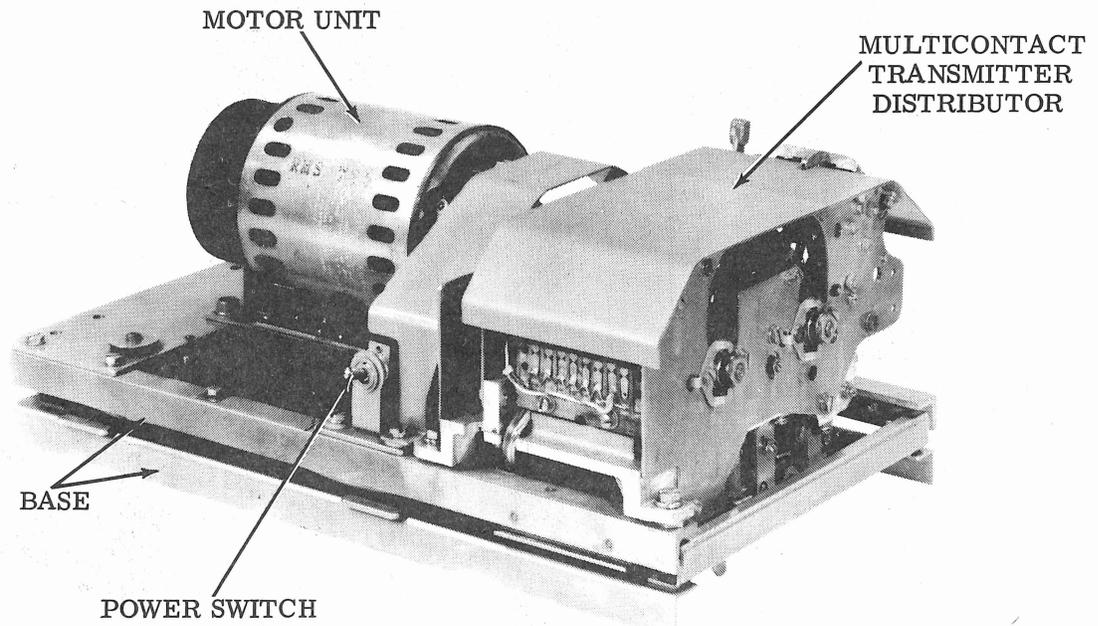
Multicontact Single Mounting Transmitter Distributor Base (Transmitter Distributor and Motor Unit in Place)
